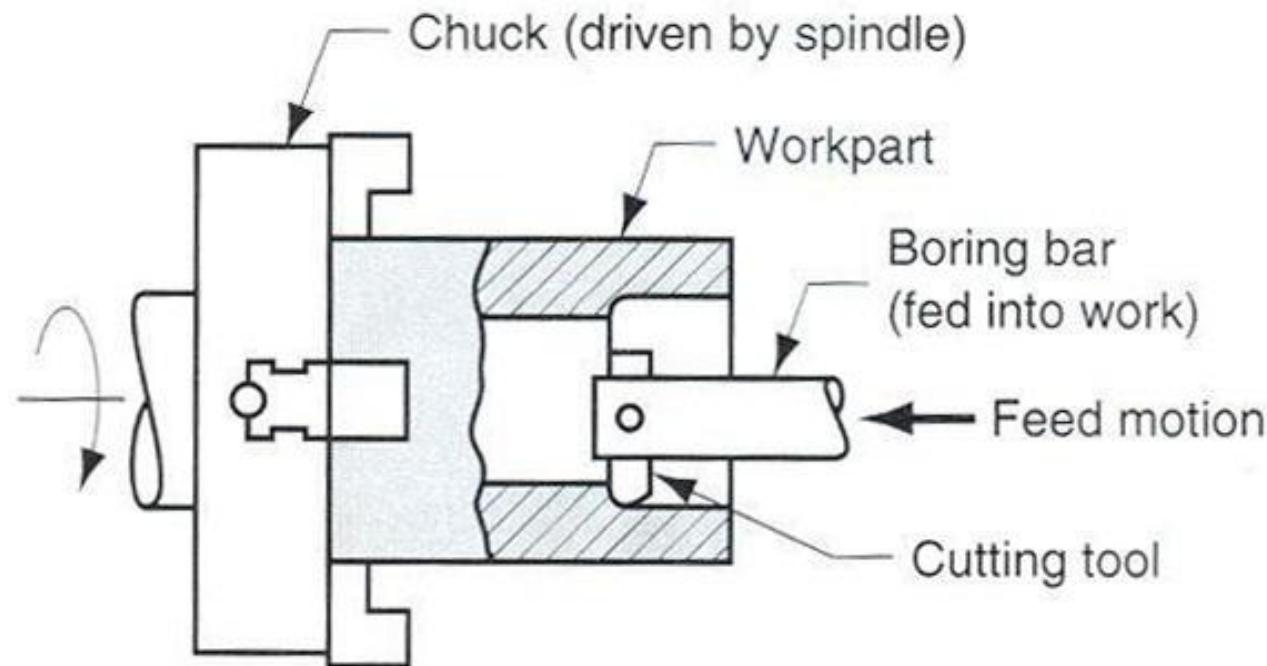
First setup of boring; boring bar is fed into a rotating workpiece.
